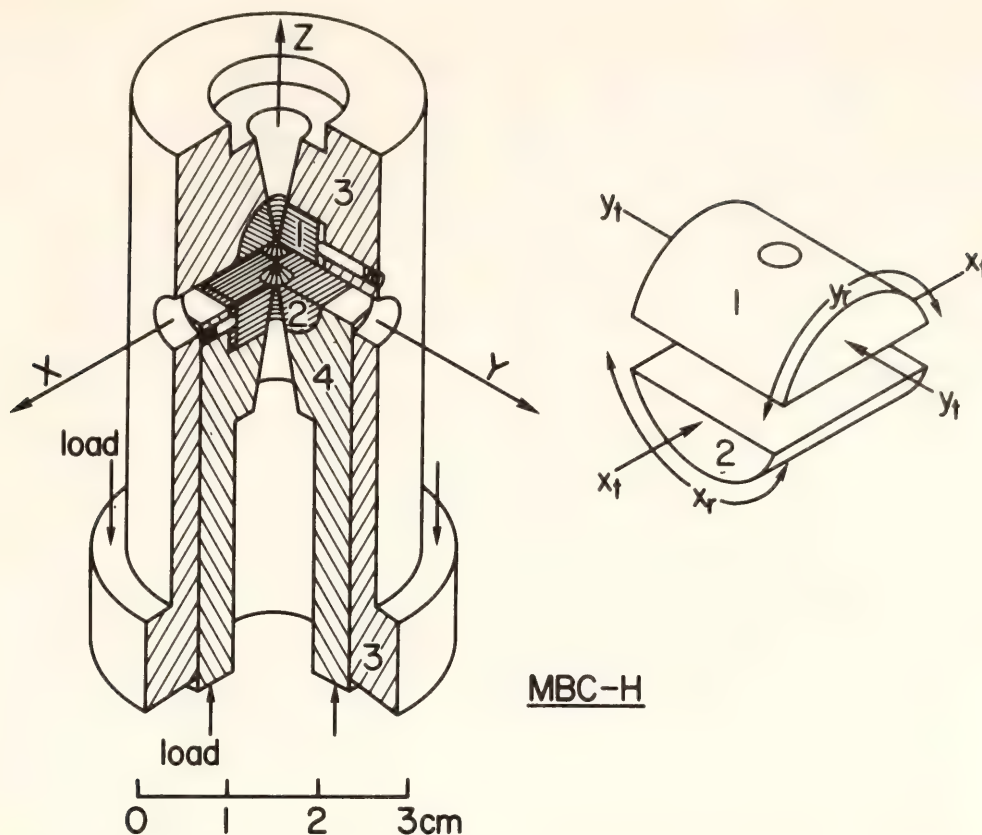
Left, cut-away view of MBC-H; right, exploded view of rockers: 1, upper rocker; 2, lower rocker; 3, cylinder; 4, piston.
